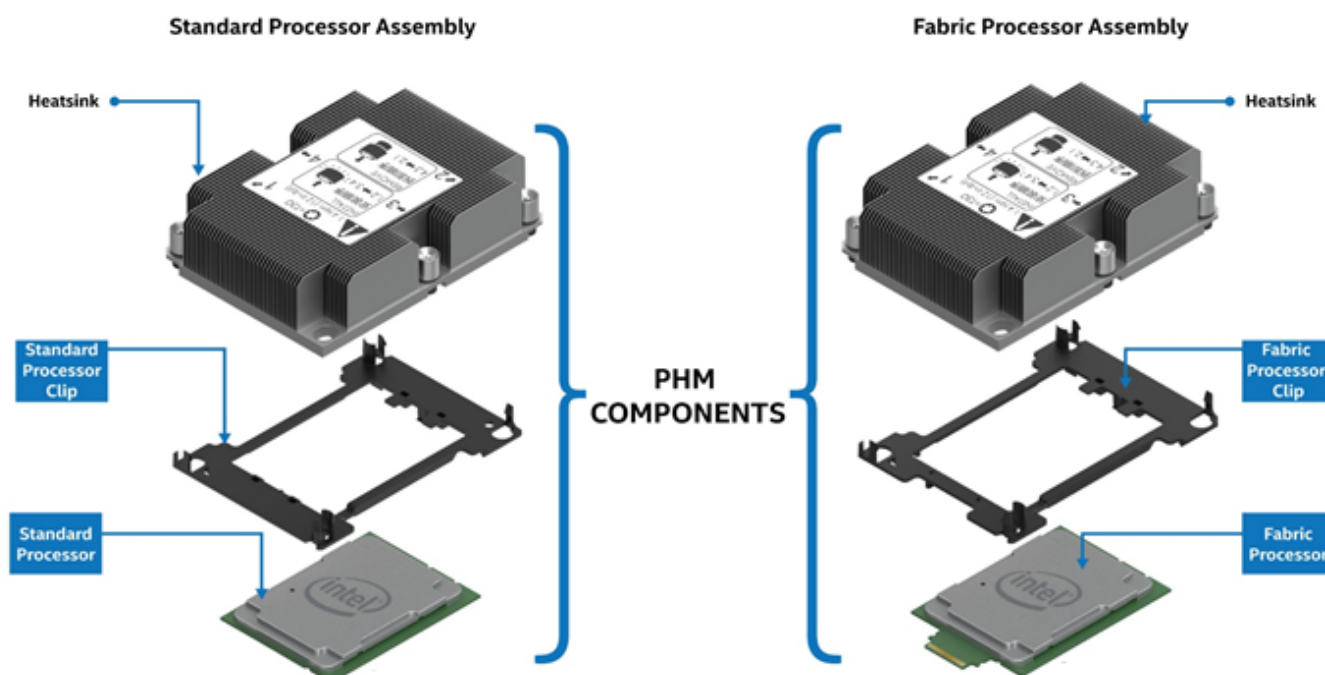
Processor Heat Sink Module (PHM) Reference Diagram
